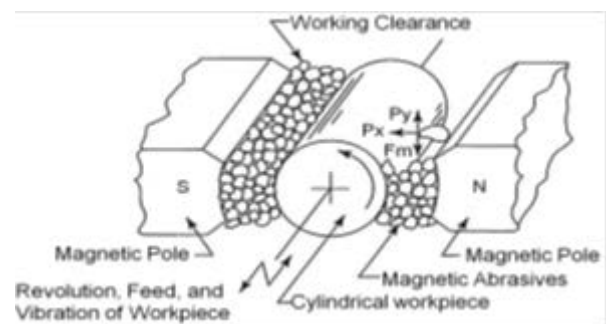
Schematic diagram of the cylindrical magnetic abrasive finishing
